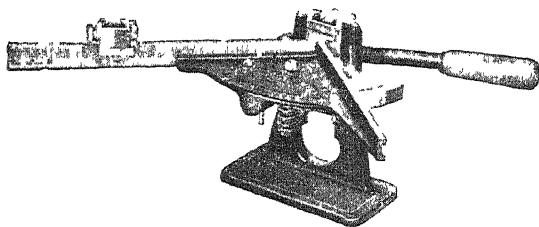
"ROUSE" HAND-MITRING MACHINE FITTED WITH $\frac{1}{4}$ -POINT CUTTING MICROMETER ADJUSTMENT.
